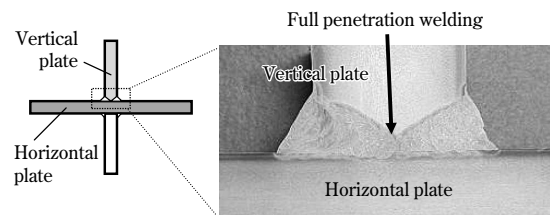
Cross section of T-weld joint of specimen 1
